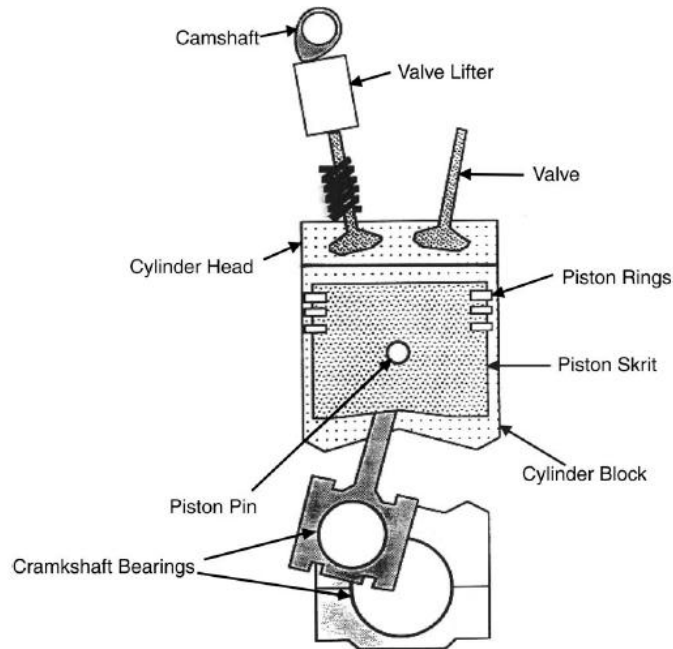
Schematic diagram of a basic overhead cam engine showing various engine parts: camshaft, valve-train, piston ring, piston skirt, cylinder block, crankshaft [65].
